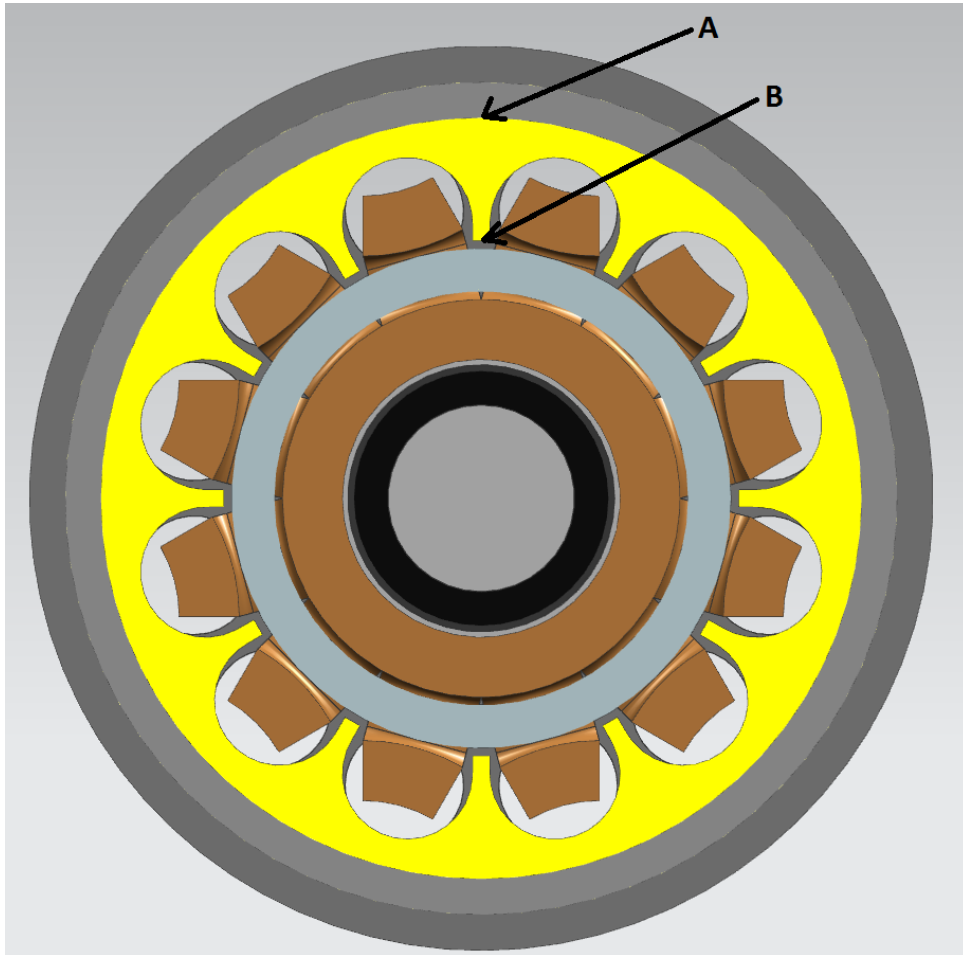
The cross-section view of the motor housing design with the toroidal winding motor
